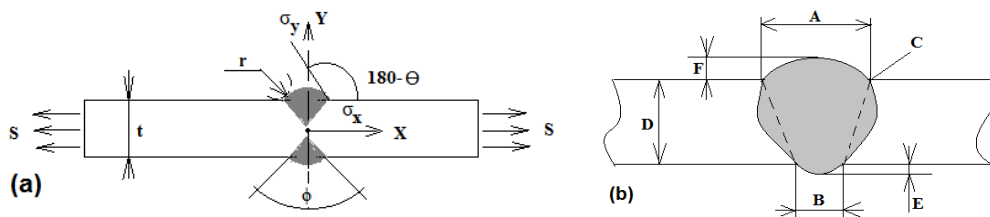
(a) Schematic illustration of the geometrical parameters relevant to a typical butt weld with a double V edge preparation, where r is the weld toe radius, ϕ the weld flank angle and t the plate thickness; and (b) the geometrical structure of a weld, where A is the weld face, B the root of the weld, C the weld toe, D the plate thickness or weld penetration, E the root reinforcement, and F the face reinforcement.
